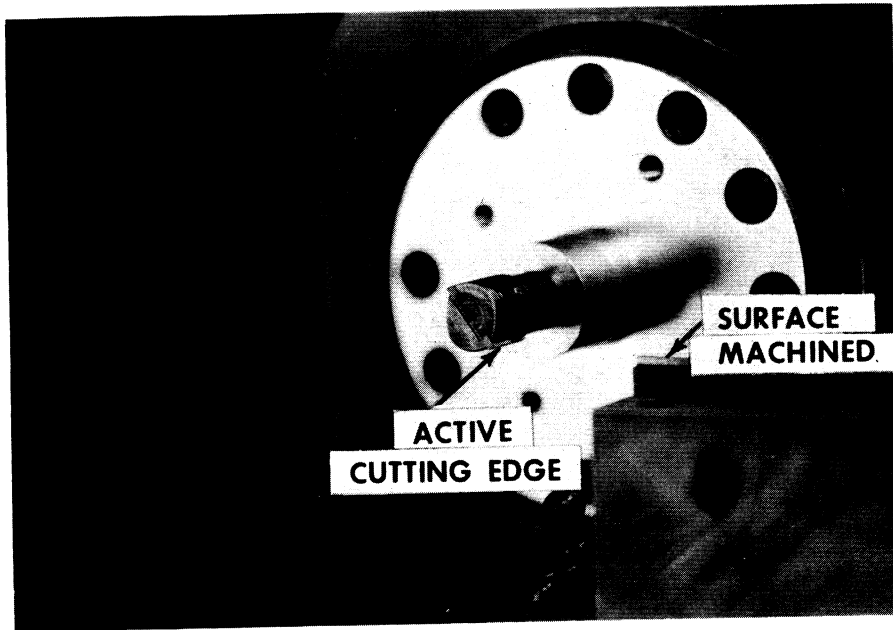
Set-up for studies of single-tooth-cutter wear. Cutter 1-1/2 in. in diameter with tungsten carbide insert. Cutter mounted in spindle of Alcoa lathe. Workpiece A-110 titanium alloy.
